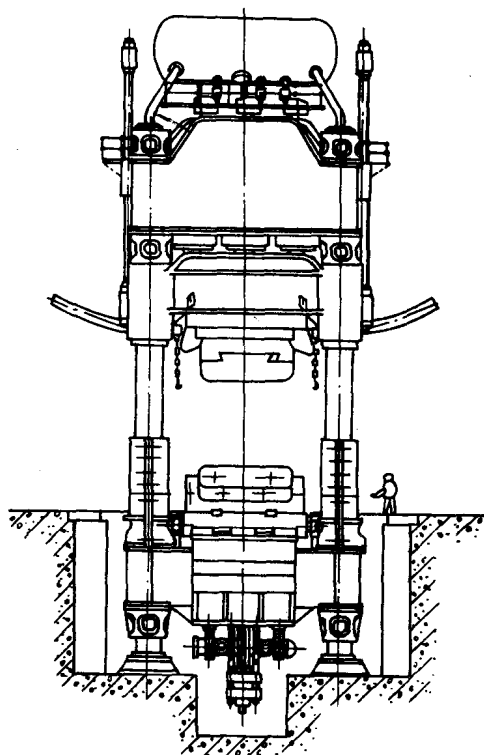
A 120 MN open-die forging hydraulic press [154]
